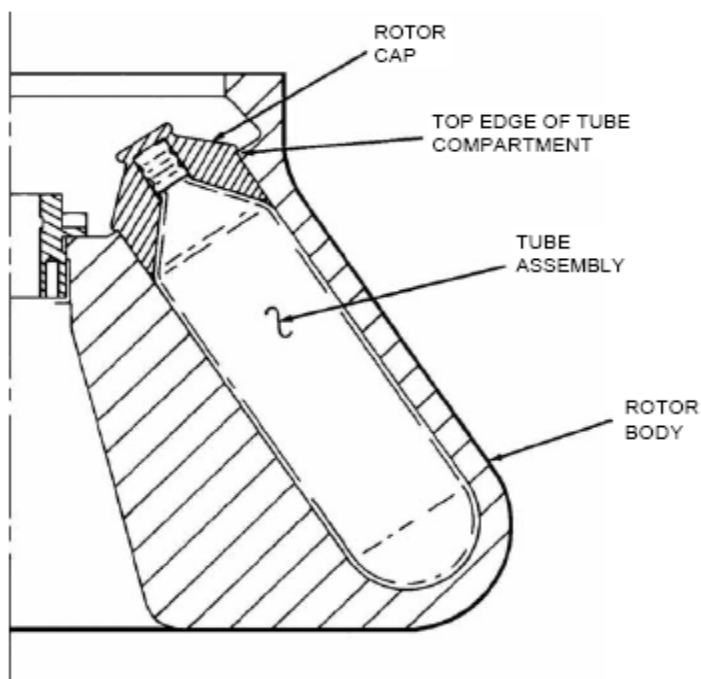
Properly Seated ULTRACRIMP® Rotor Cap
